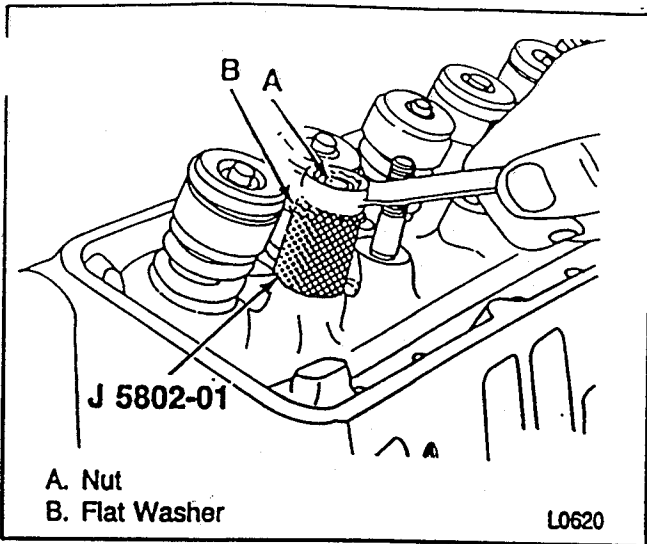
Removing the Rocker Arm Stud (5.0L and 5.7L Engines)
